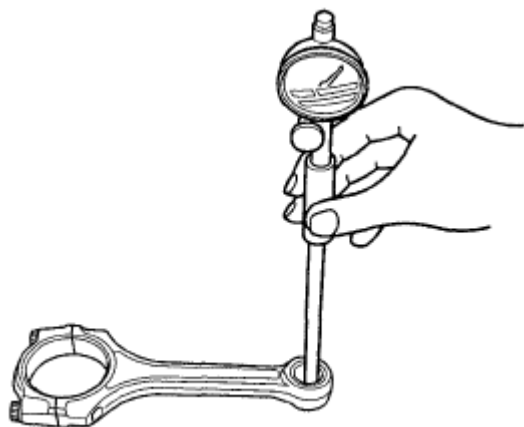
Identifying Piston Pin-To-Connecting Rod Clearance
